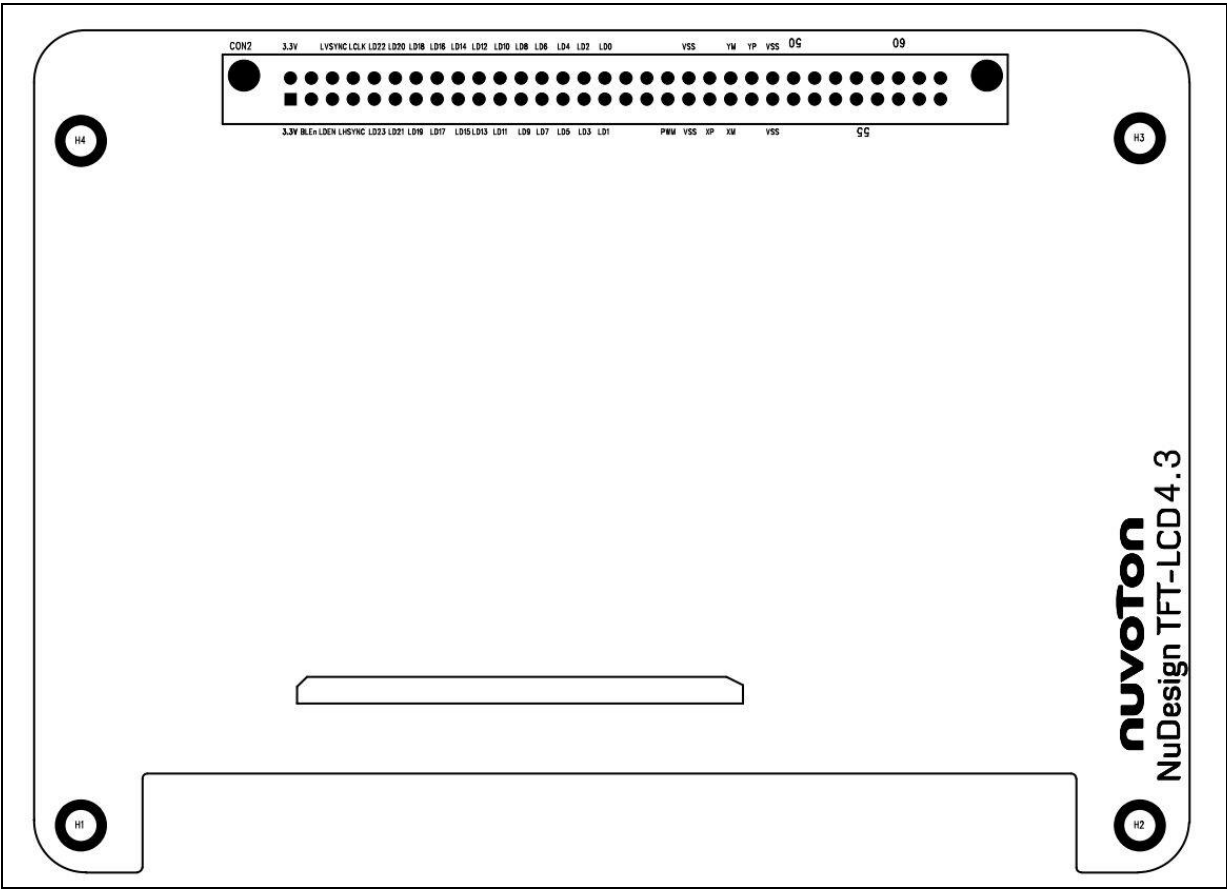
NuMaker-TFT-LCD4.3 PCB Placement (Front)
